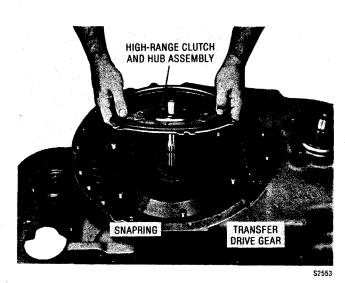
Removing high-range clutch and hub assembly (TT, TTB 2221-1, 2421-1 without converter-driven PTO)
